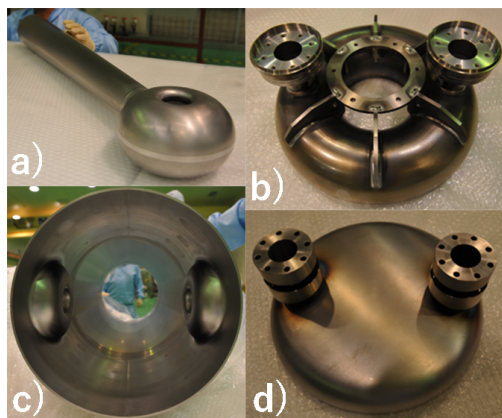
Photographs of the stem (a), top torus (b), inner view of outer cylinder (c), and bottom dome (d) of an SC-QWR.
